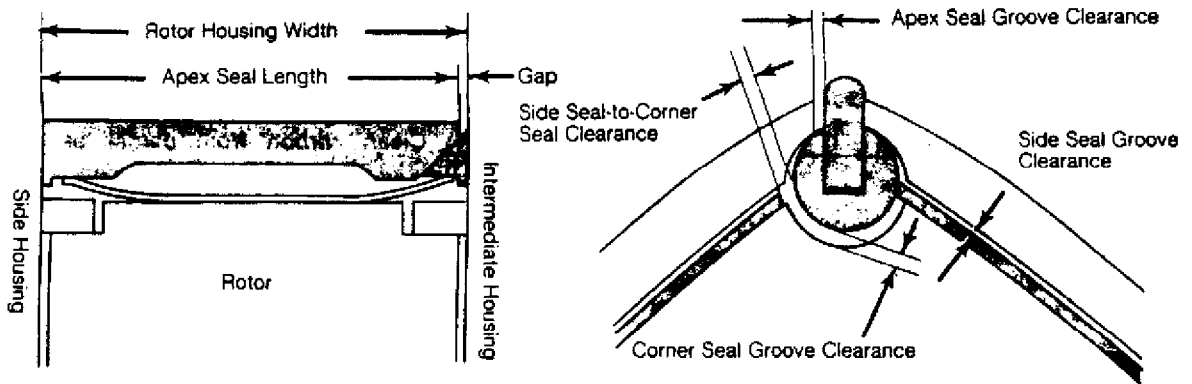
Measuring Clearance of Apex, Side & Corner Seals
